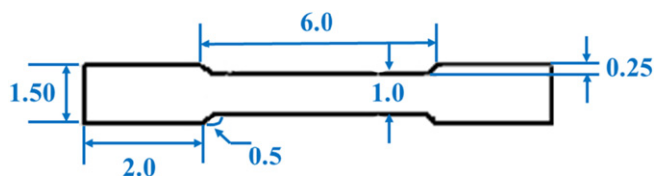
Specimen geometry used for microtensile testing. All dimensions are in mm.
